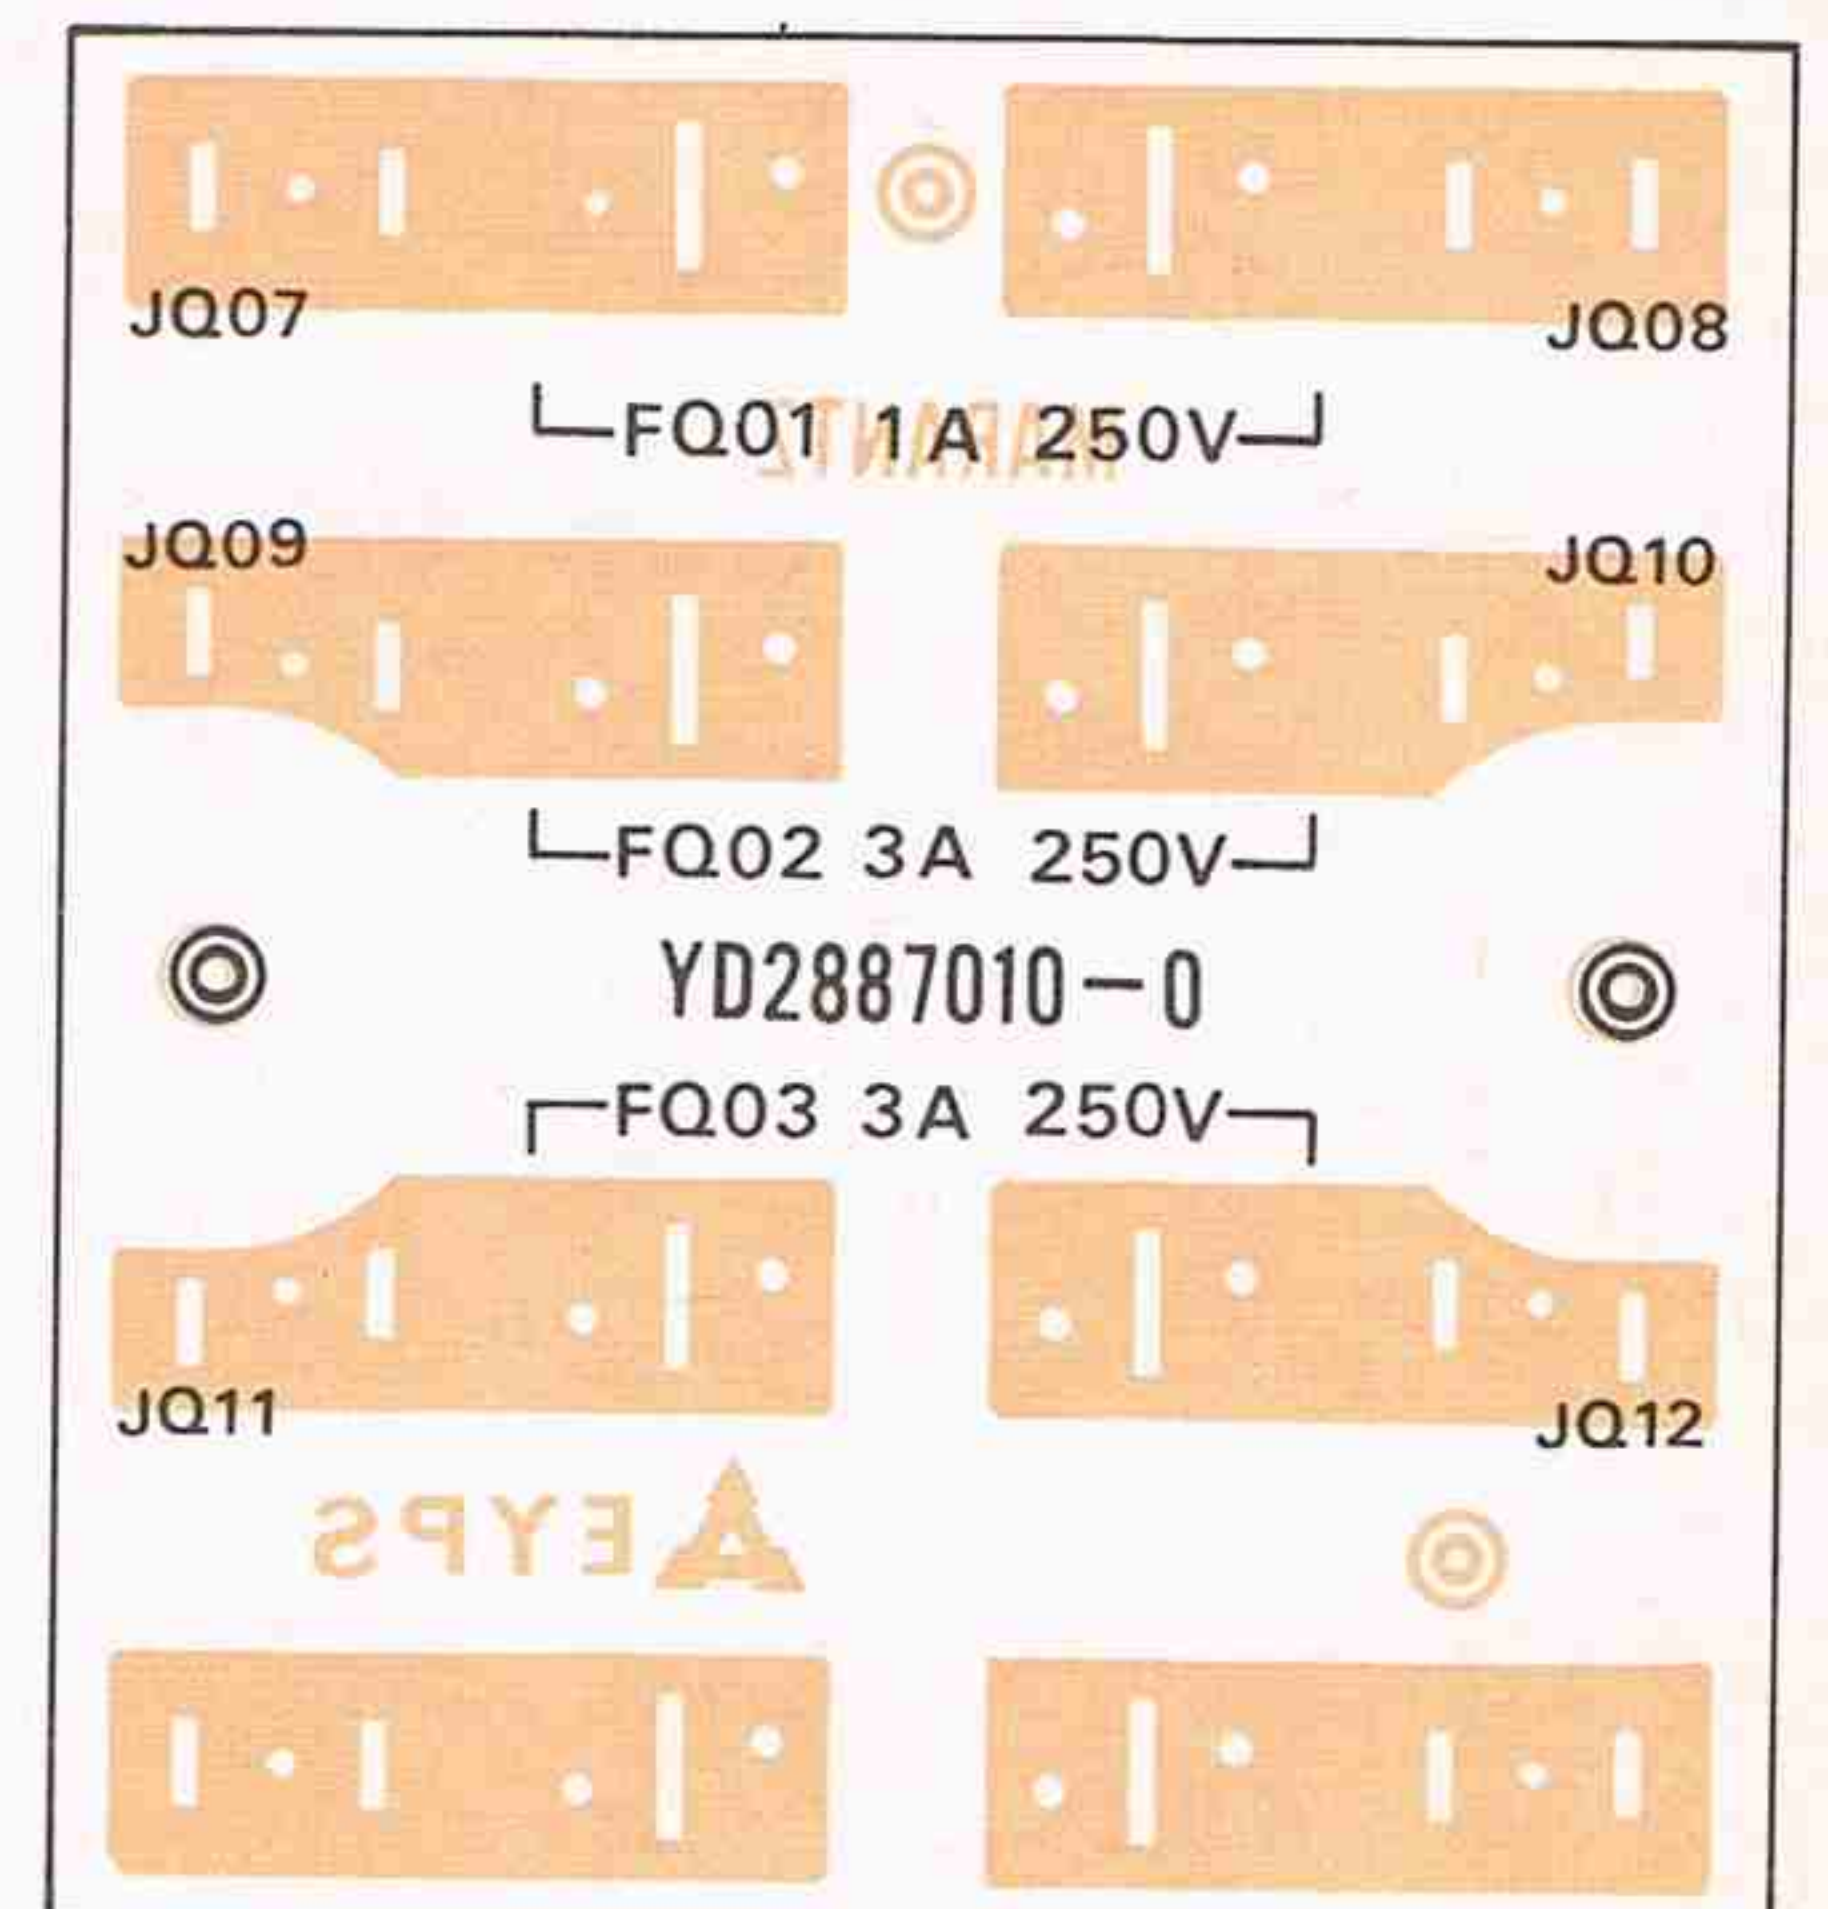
Fuse Mount Assembly PQ01 Component Locations
